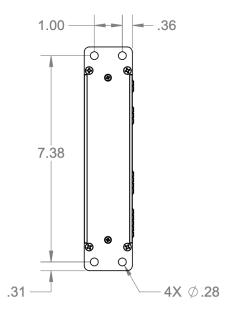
Bottom View Mounting Flange Hole Dimensions
